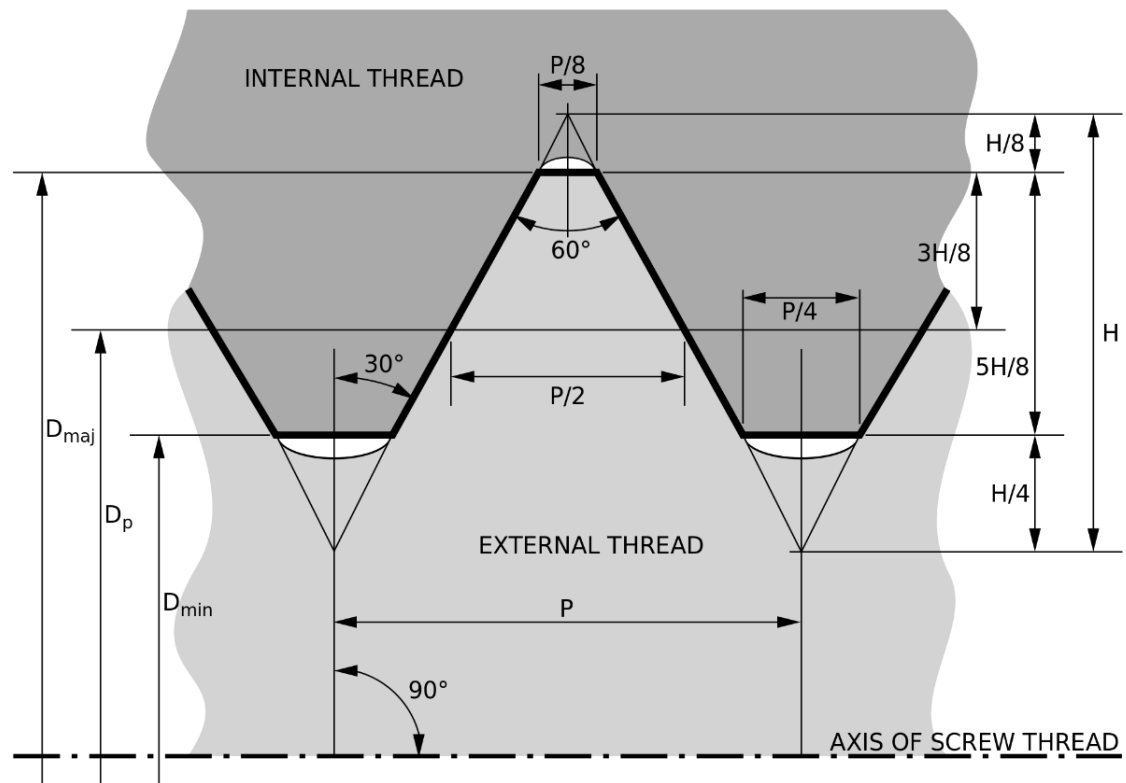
ISO Metric Thread Form. (ISO metric screw thread, 2016)
